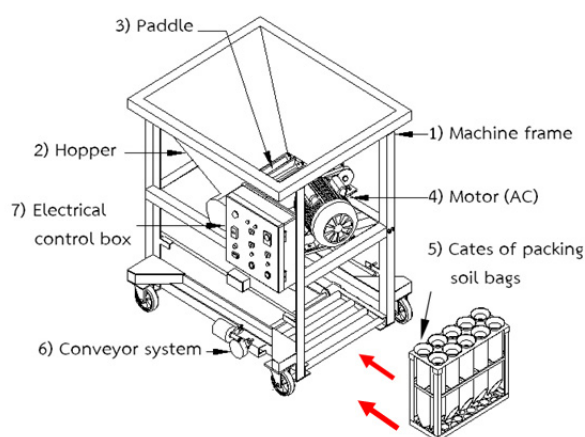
Assembly drawing and details of a soil packing machine for pre-transplanting para rubber bags, Model 2.
